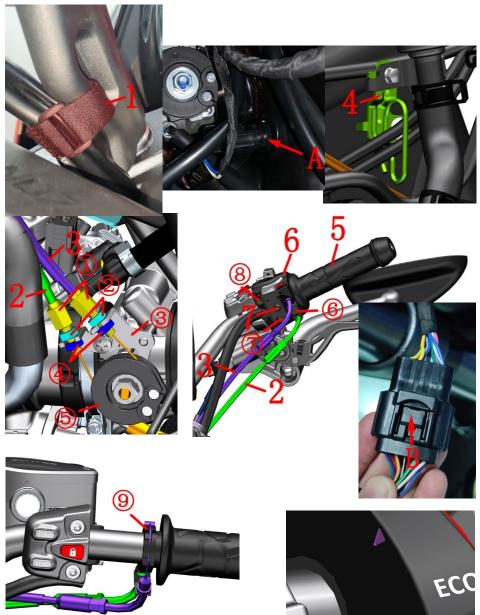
FRONT FORK COMPONENT		Replace the throttle cable	CHK	(0)
